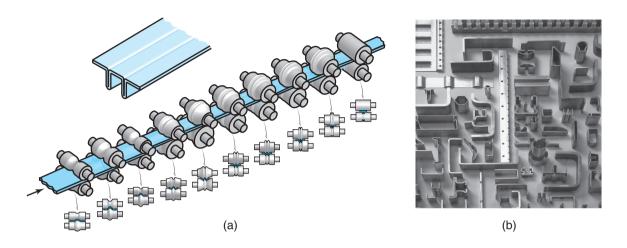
(a) Schematic illustration of the roll-forming process. (b) Examples of roll-formed cross sections. *Source:* (b) Courtesy of Voestalpine Roll Forming Corporation.
